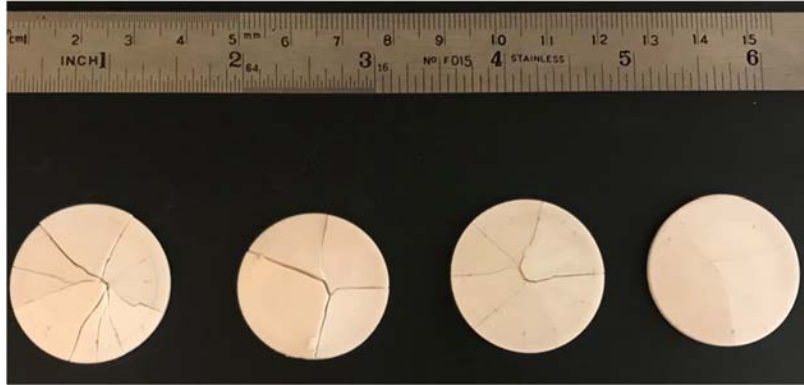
After the flexural strength tests, photos of fractured specimens of 5 g, 6 g, 7 g and ball milled 6 g respectively.
